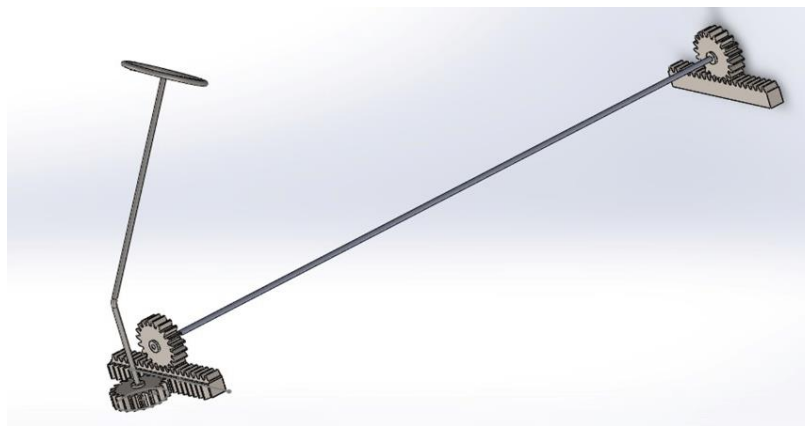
Quadra Wheel Rack and Pinion Steering Mechanism
